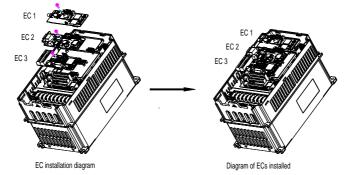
VFD of 7.5 kW or higher with expansion cards installed
